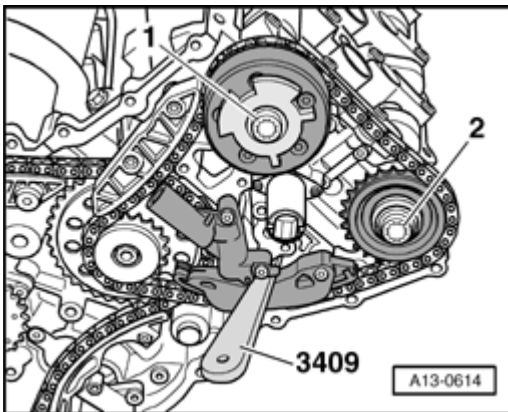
Tightening Camshaft Bolt On Exhaust Camshaft Of Right Cylinder Head To Initial Tightening Torque
